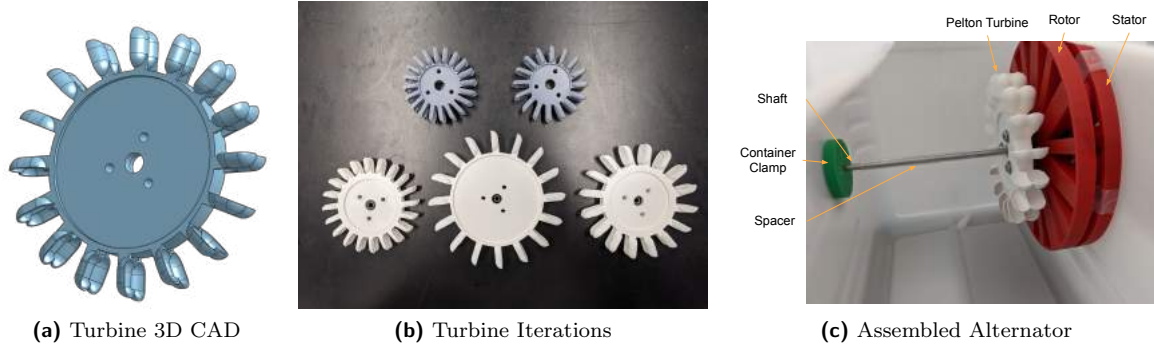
(a) 3D CAD model of the Pelton turbine showing the characteristic double-scooped buckets. The 3-bolt mounting design was used to connect it to the rotor. (b) Some Pelton versions explored for the project. The bottom right turbine was the one that was used. (c) Assembled alternator mounted on the shaft inside the container.
